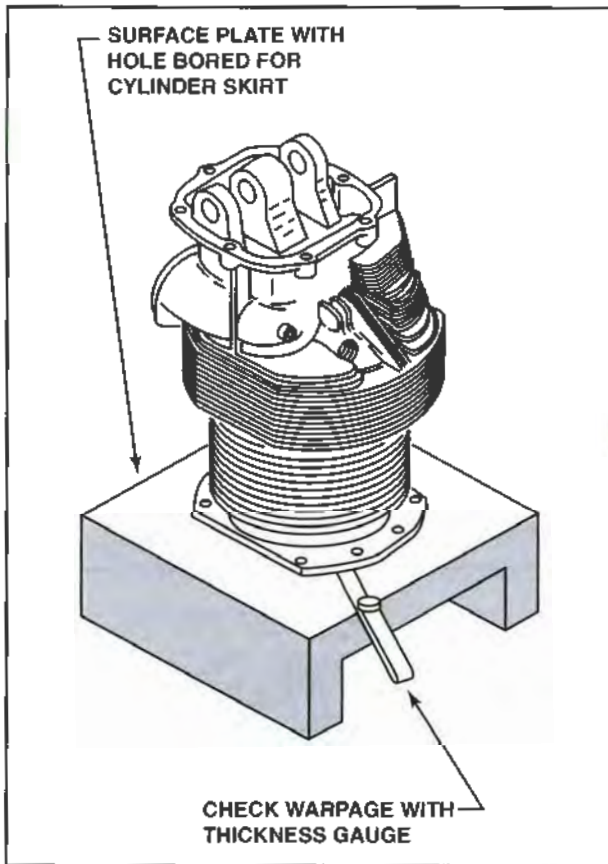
To inspect a cylinder flange for warping, place the cylinder on a jig and attempt to pass a thickness gauge between the flange and jig at several points around the flange.
